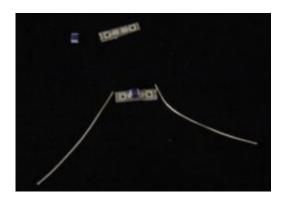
The small inductors L1, L2 and L4 were soldered on a small PCB board first, using wires to connect them to the rest of the circuit.
